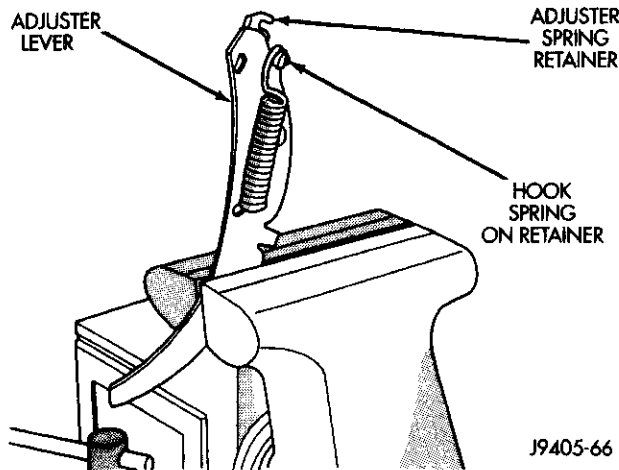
Assembling Adjuster Lever, Spring And Retainer
